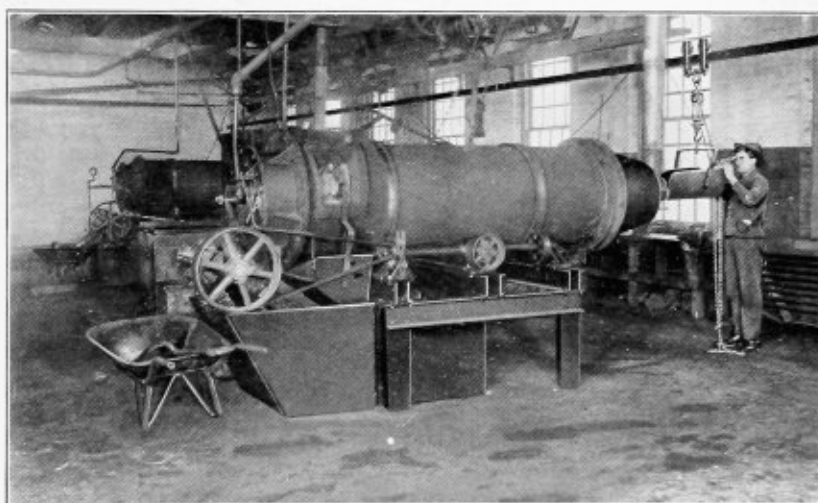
Rotary Hardening Furnace—Oil Fuel. Showing Trolley Method of Charging.
